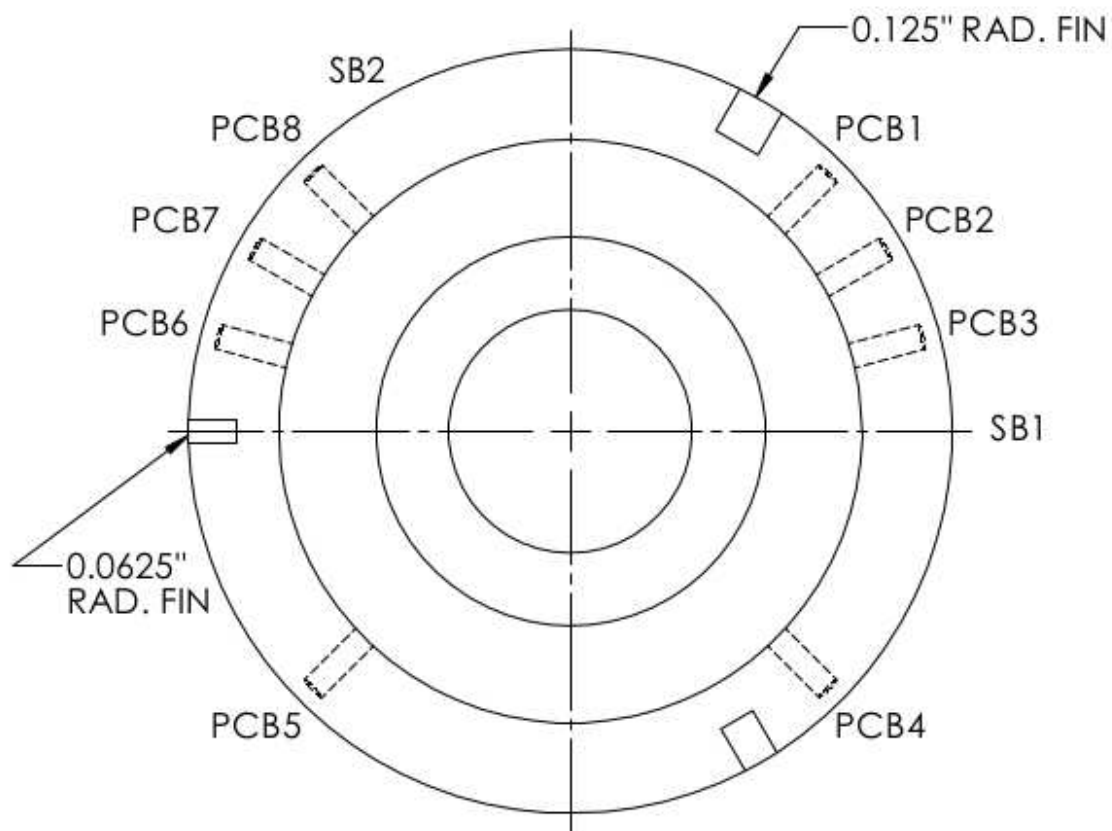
Entry 5 PCB and SB locations. View from back end of cone.
